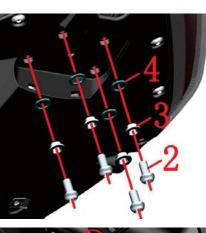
REAR COVER COMPONENT		Rear cover tail light component 1	CHK
